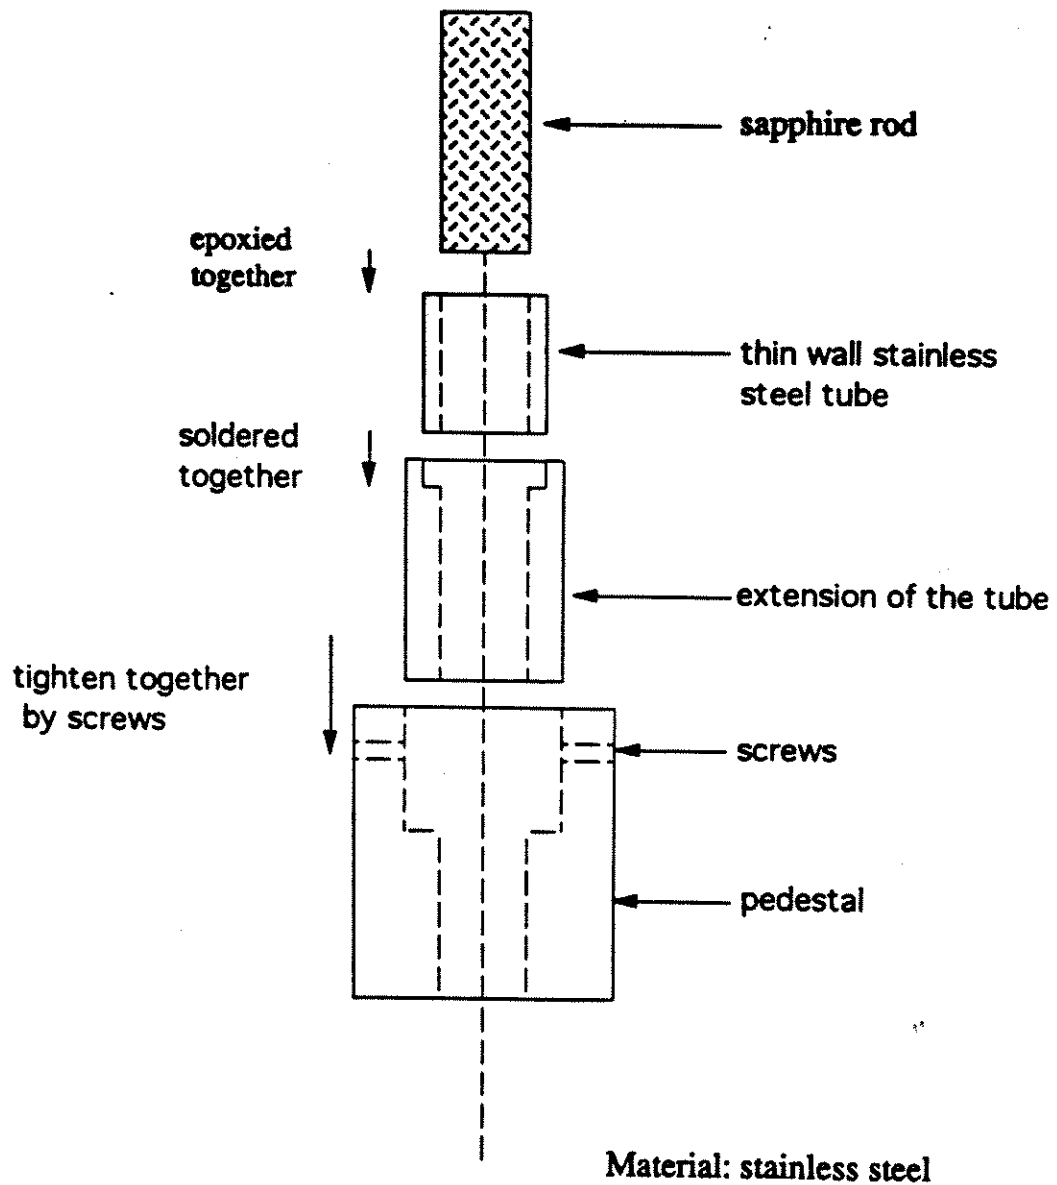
A schematic of the sample supporting assembly. A sapphire rod fits into a thin wall stainless steel tube snugly. An extension piece for the tube, which is mounted on a stainless pedestal, also serves to support the rod.
